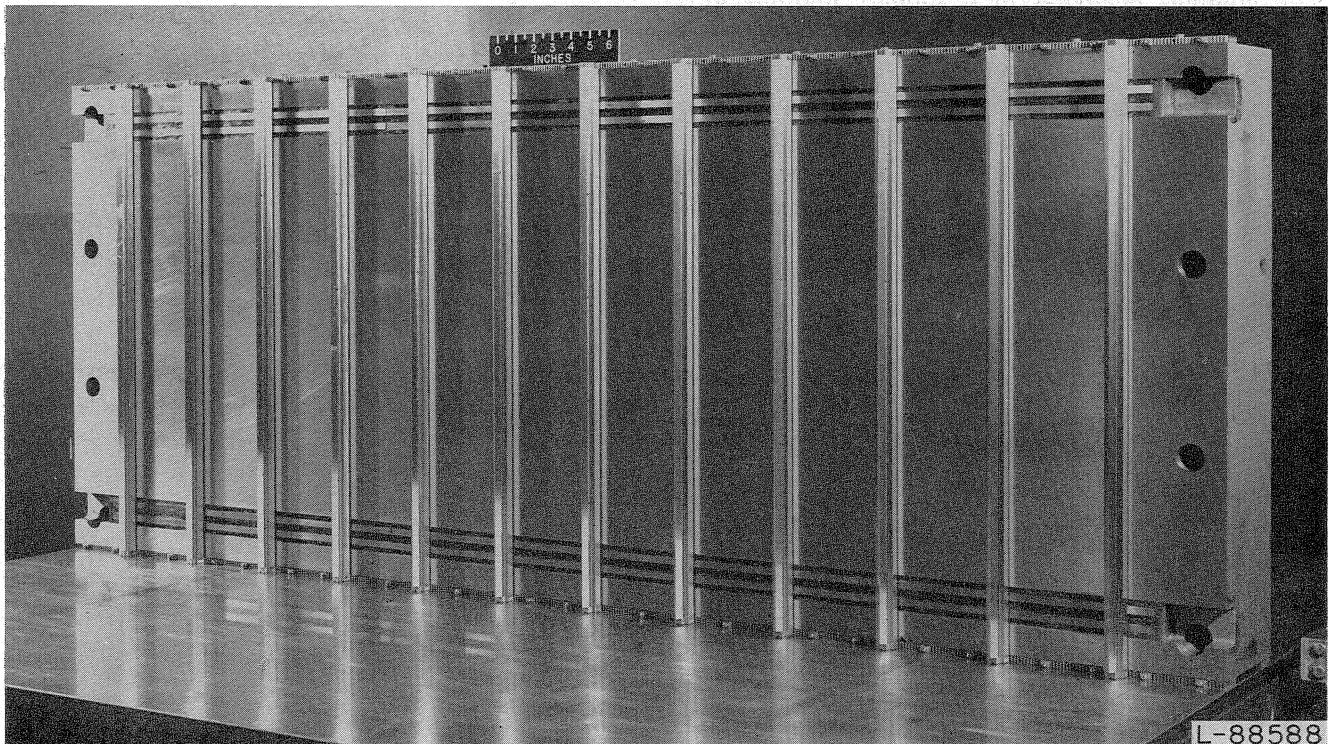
Base plate of multiple-bay fixture showing knife edges used to support flat plate.
